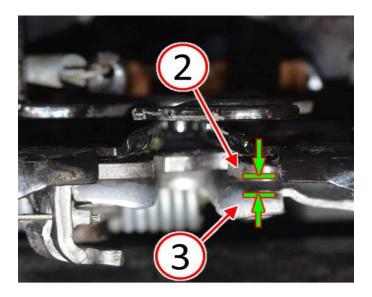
Hood Latch Ratchet and Latch Cover Plate Clearance
